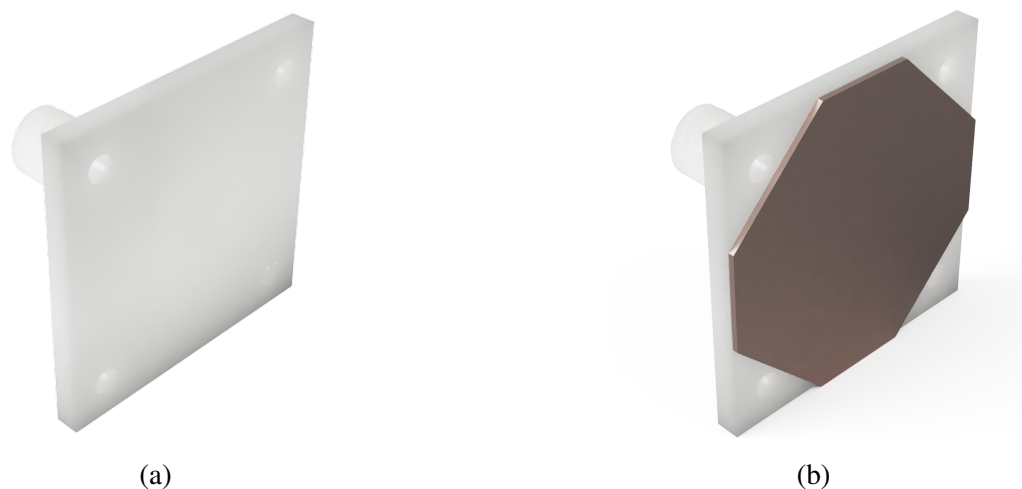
Illustration of the a) main deposition sample holder and b) deposition sample holder configured with OFHC Copper for beam measurement.
